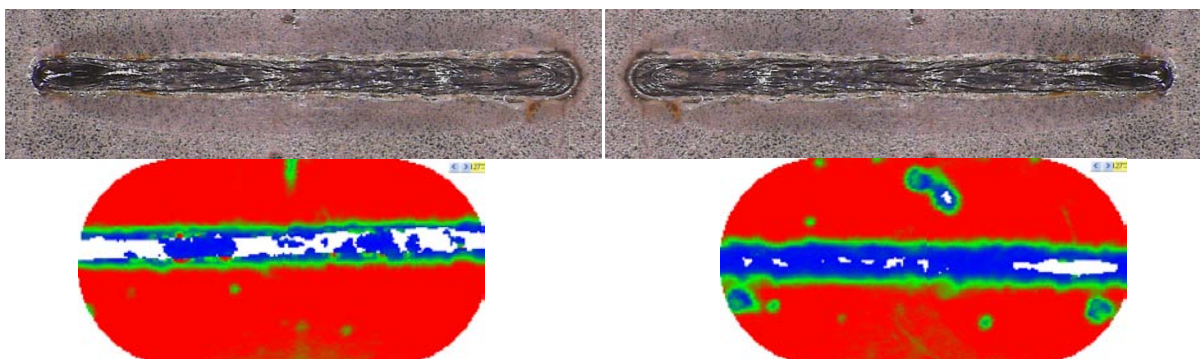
Weld top bead (nubbed, sample B) and Amstech result from top bead (L) and bottom bead (R)
